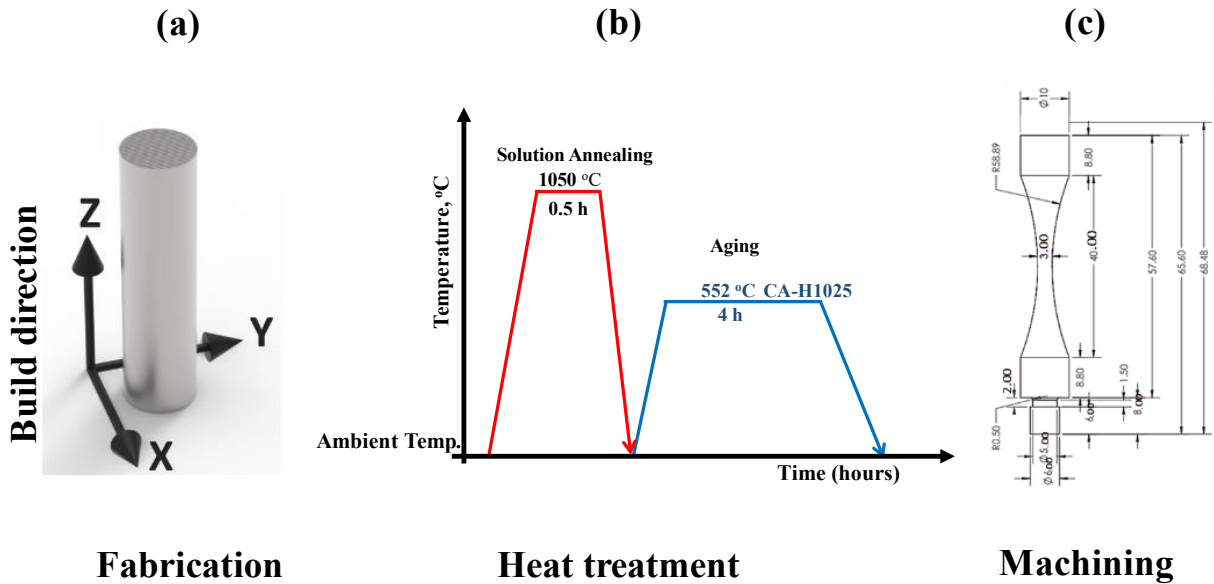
(a) Build direction of the cylindrical specimen, (b) applied heat treatment processes, and (c) final machined geometry of the ultrasonic specimen. All the dimensions are in mm.
